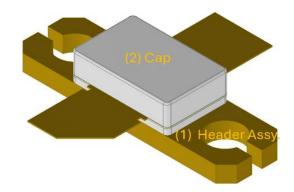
Hermetically sealed SOT467 ACC Package.
